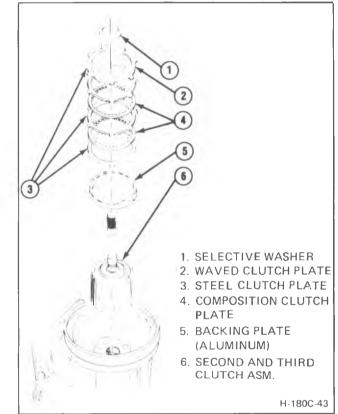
Installing Second/Third Clutch Assemblies Into Case
